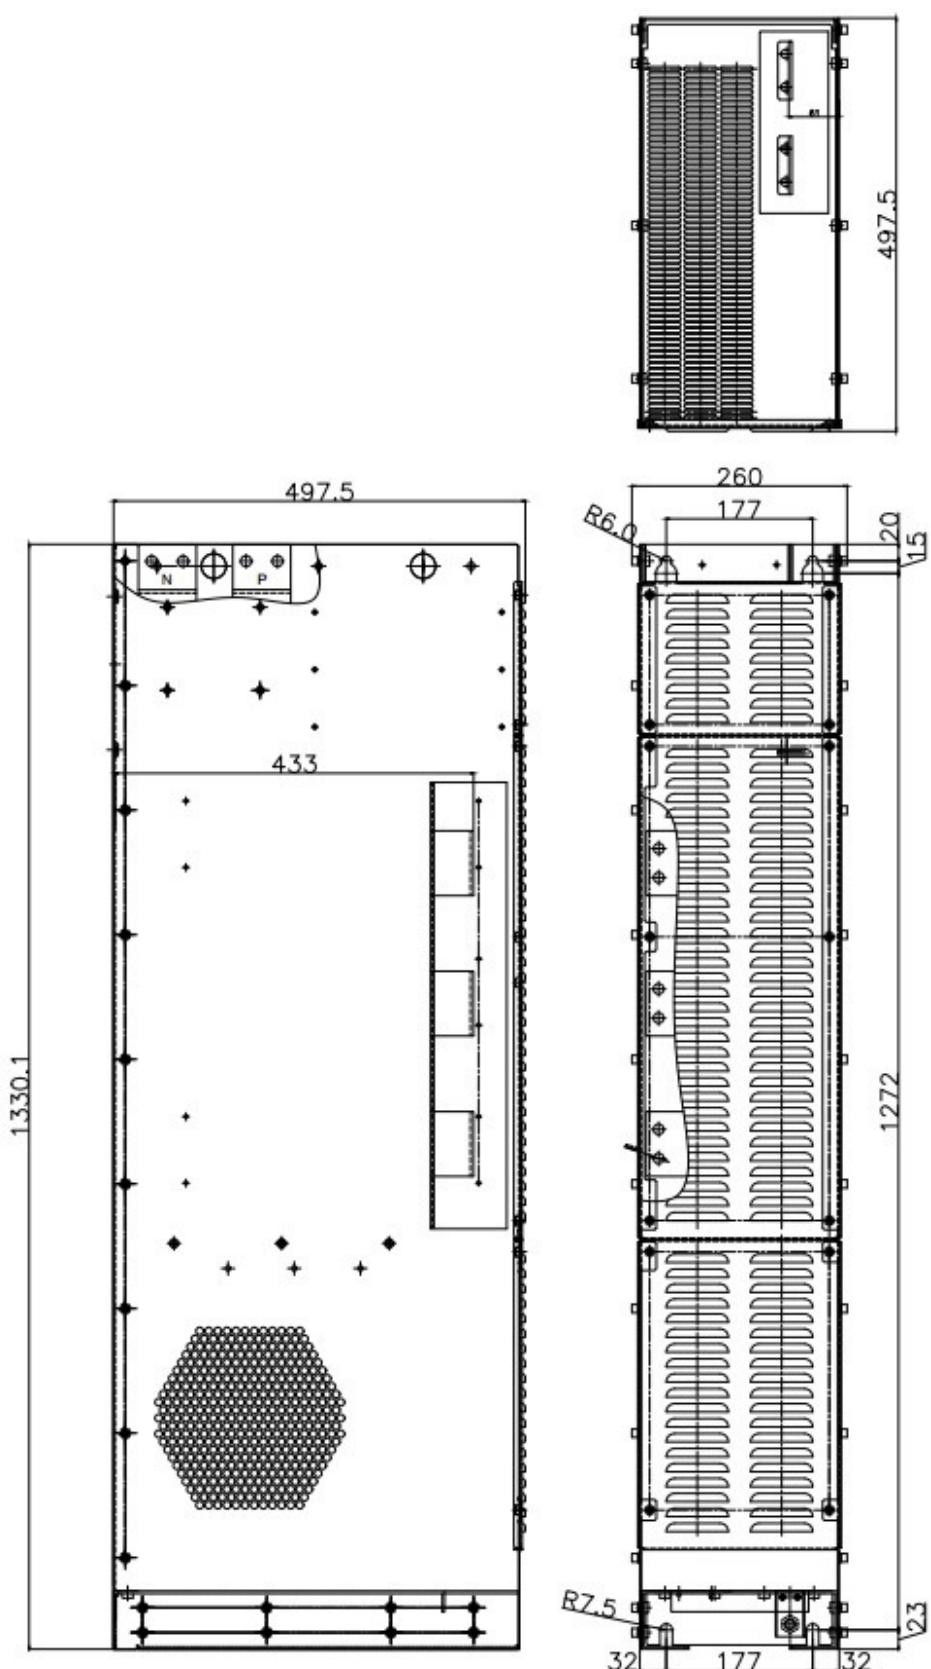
(3) 500VD4N(K10C) Rectifier unit external dimension
